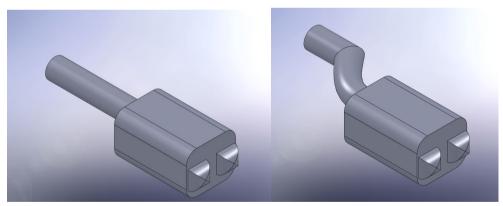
Instrument design-receiver AK-R1 6mm and 6mm curved tube
